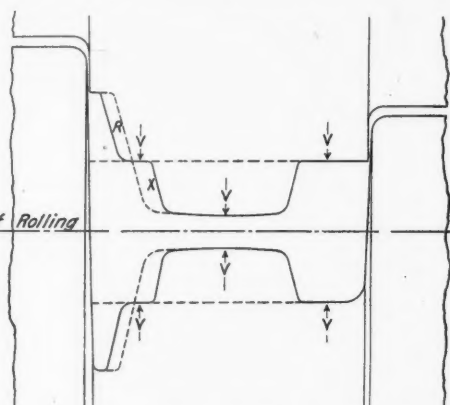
Roll Groove for Flat-Bottom Double-Head Rail.
